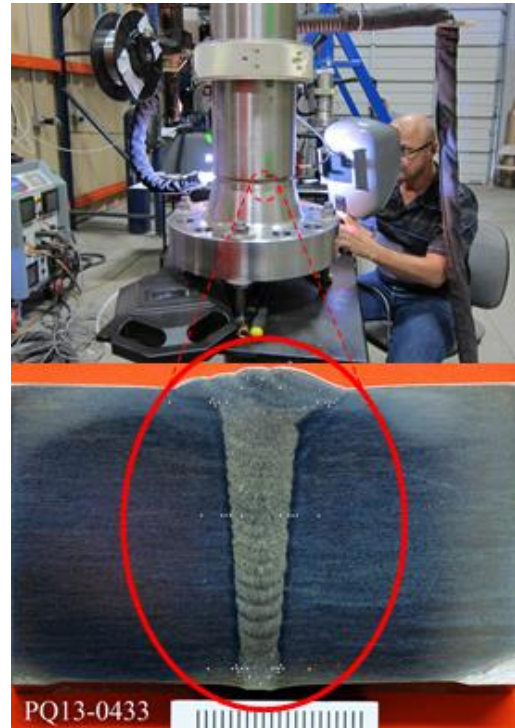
MACHINE HOT WIRE GTAW WELDING OF HEAVY WALL DSS USING NARROW GROOVE JOINT DESIGN
